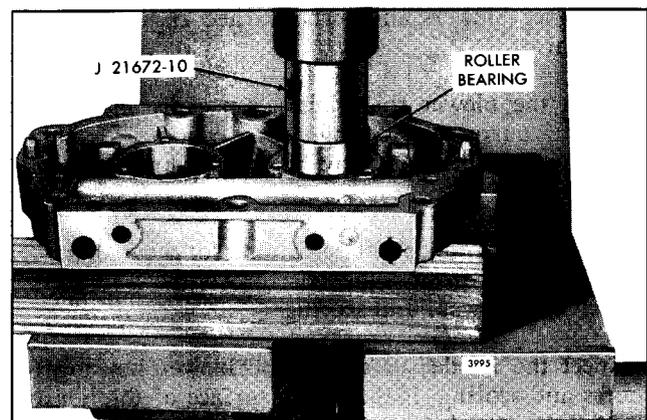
Installing Roller Bearing in Rear End Plate (Former Blower)
